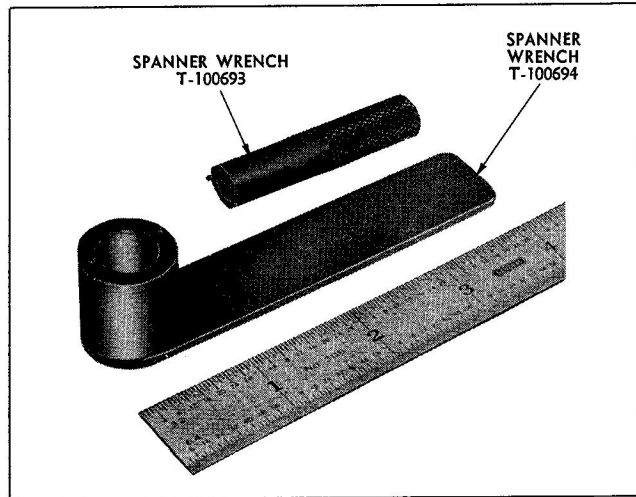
Spanner Wrenches T-100693 and T-100694
